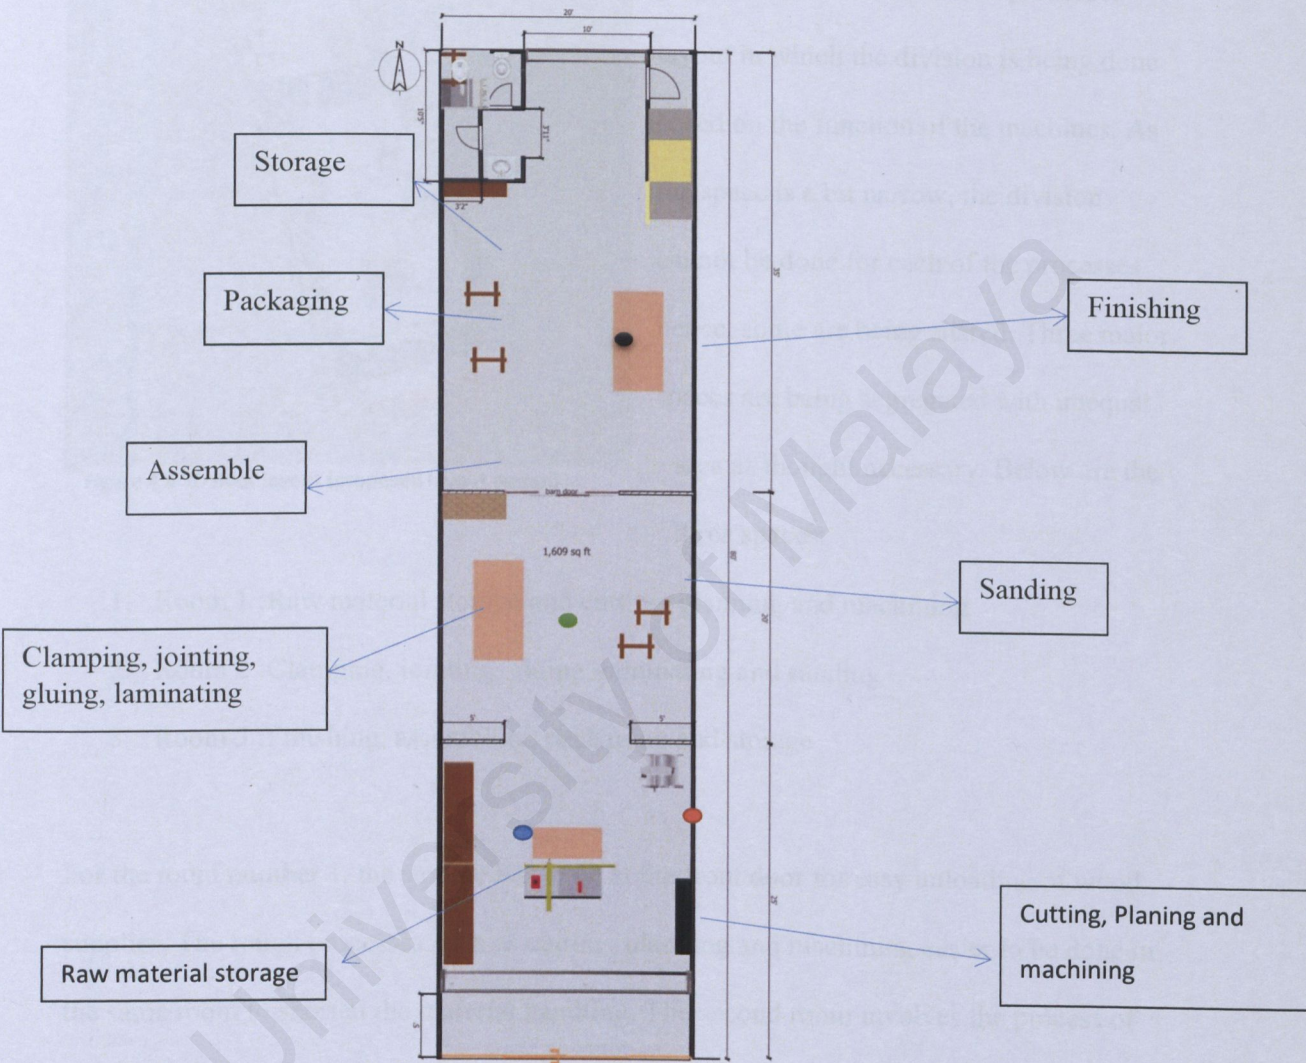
2D floor plan of production place 2 (proposed layout design)
